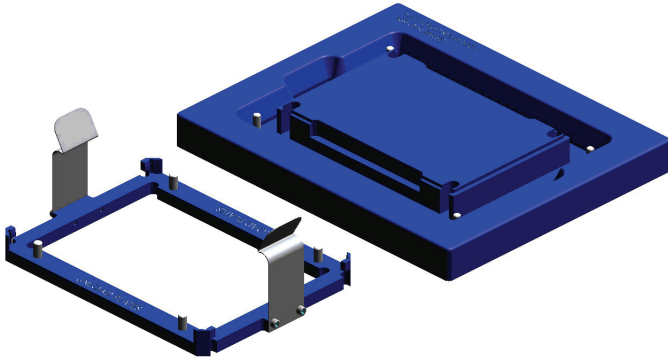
Unload Plate Ring removed from Plate Loading Base
